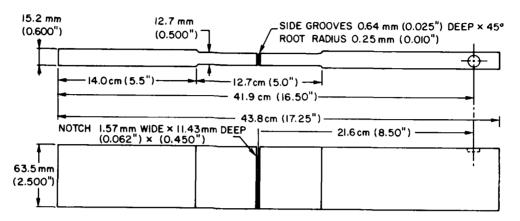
Design of the single-edge-notch (SEN) cantilever fatigue test specimen
